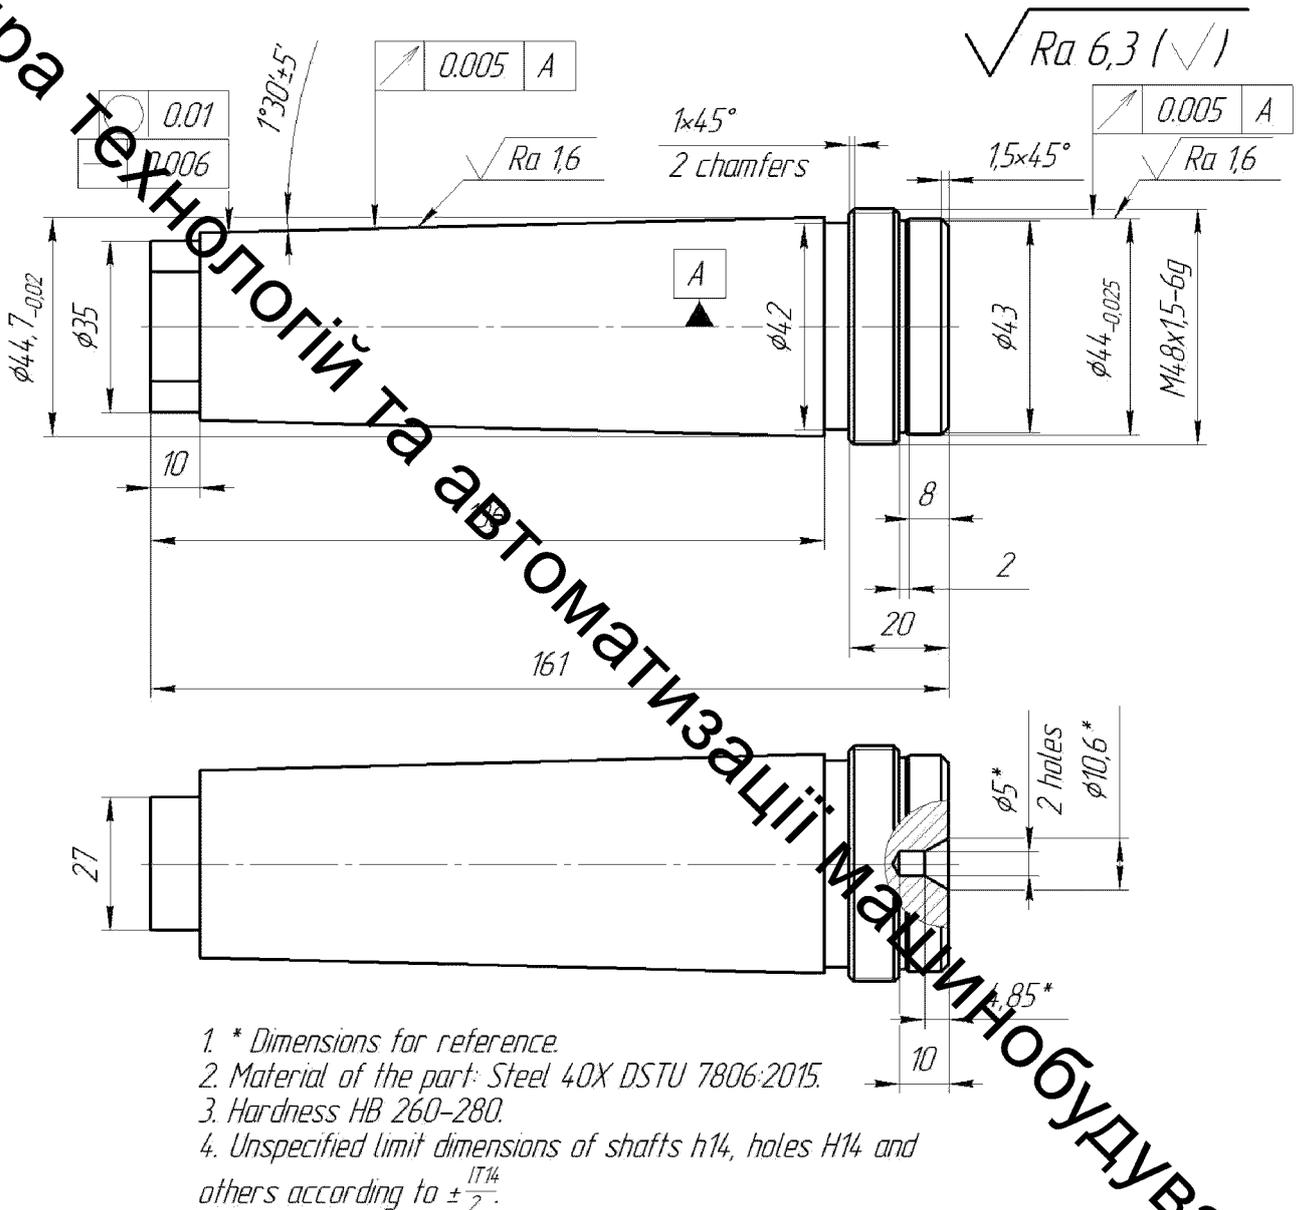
Workpiece drawing of the part "Mandrel"
